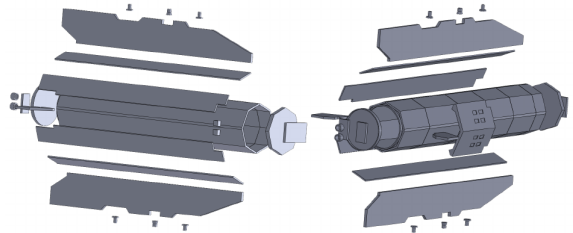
Exploded view of the CAD model of GOCE and its external components.
